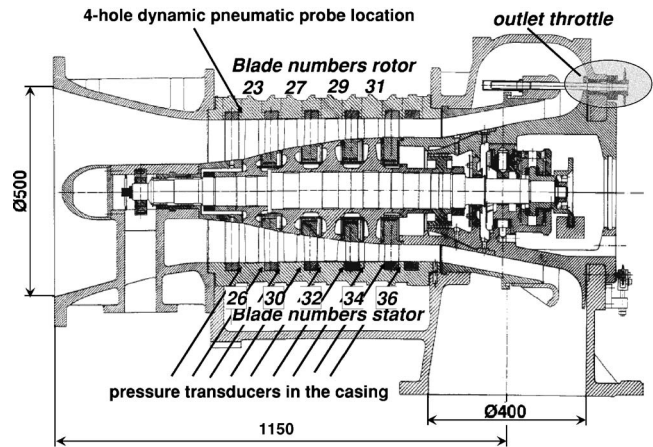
Turbomachinery laboratory four-stage high-speed axial compressor
